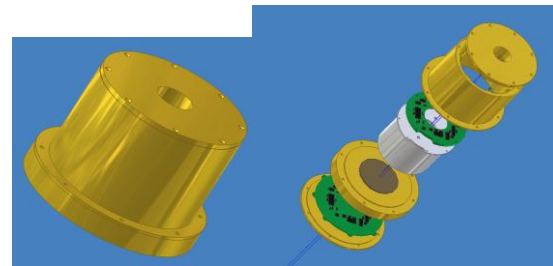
Assembled (left) and exploded (right) views of the PEBG.
